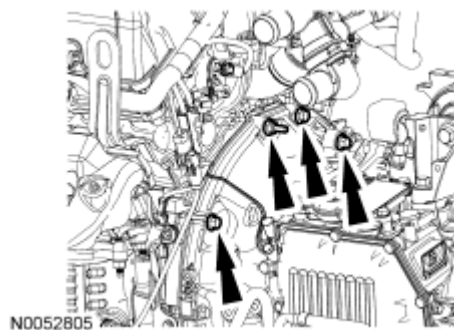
Identifying Upper Transaxle-To-Engine Bolts
